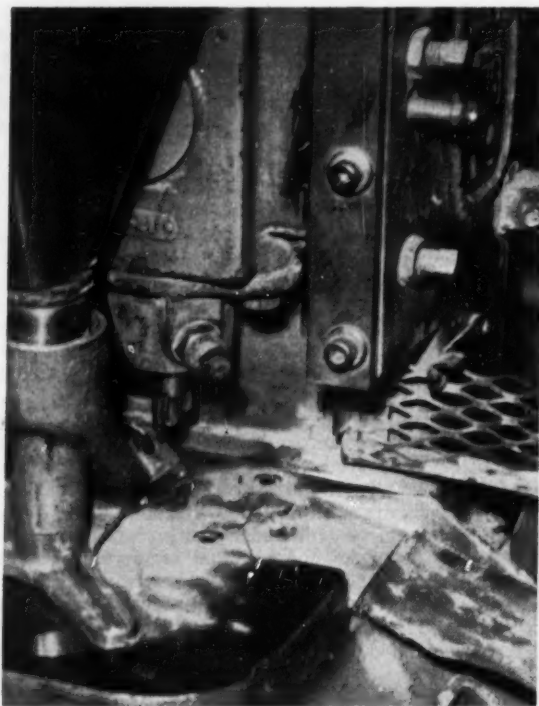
Close-up of tools mounted in press showing upper punch over die and filler shoe pushing briquetted part aside
